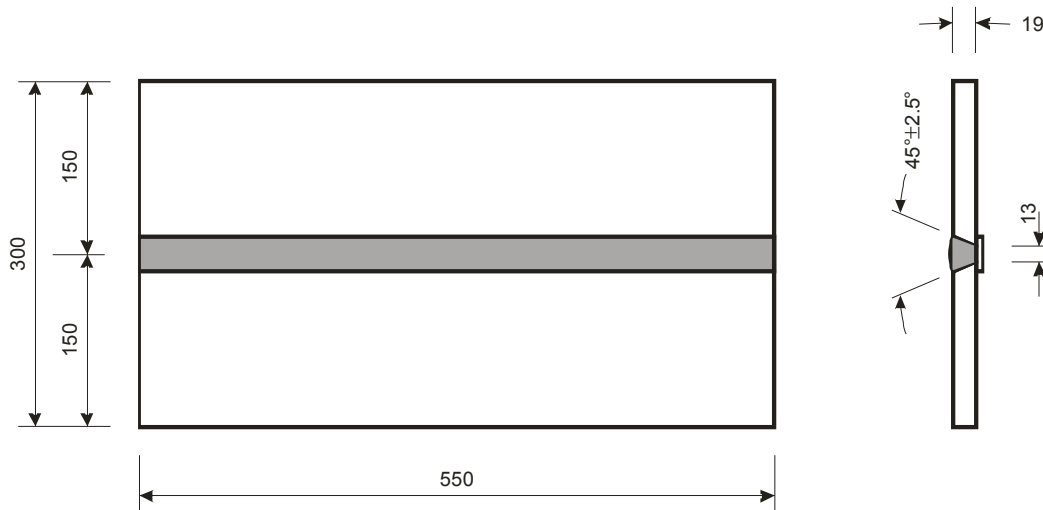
Welded plates (dimensions in mm).
